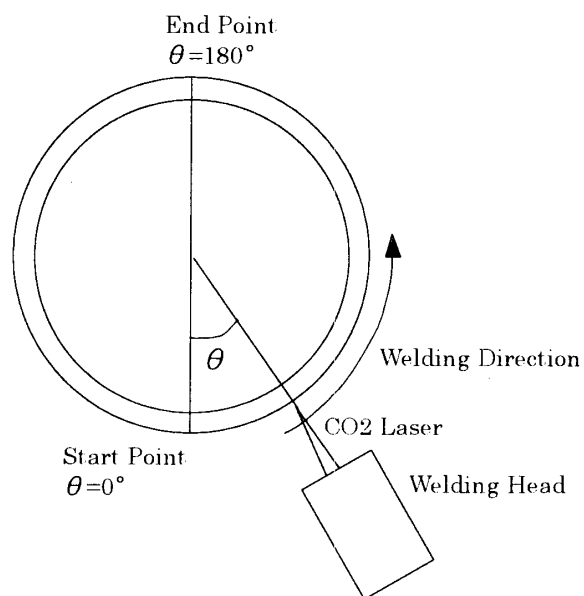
Schematic of 12.5t API X65-AlSi Steel Pipe Bead on Plate Test.
